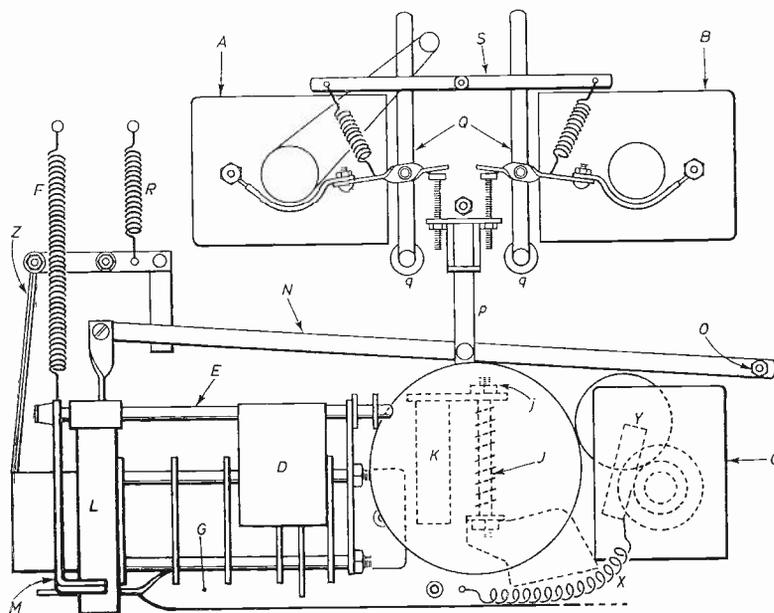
Underside view of the Motek K10 tape deck showing the main components of the mechanism. (This drawing is not to scale)
